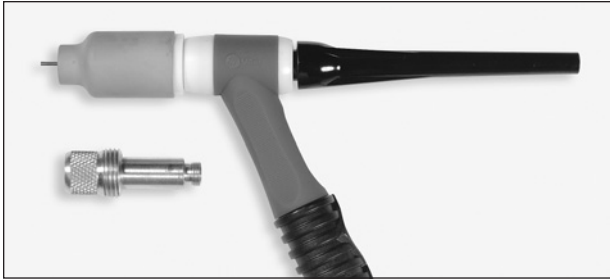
Gas lens and set up for welding on a TIG torch.
